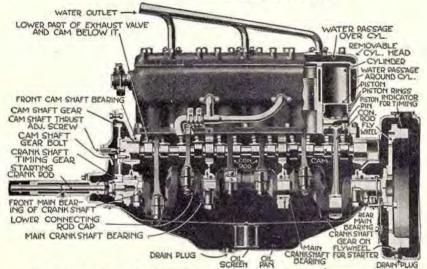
Sectional view of model "7R" six-cylinder Red Seal Continental engine, left side.
